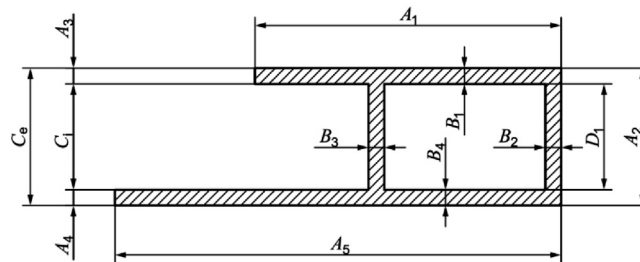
Basic cross-sectional dimensions of extruded profiles.
